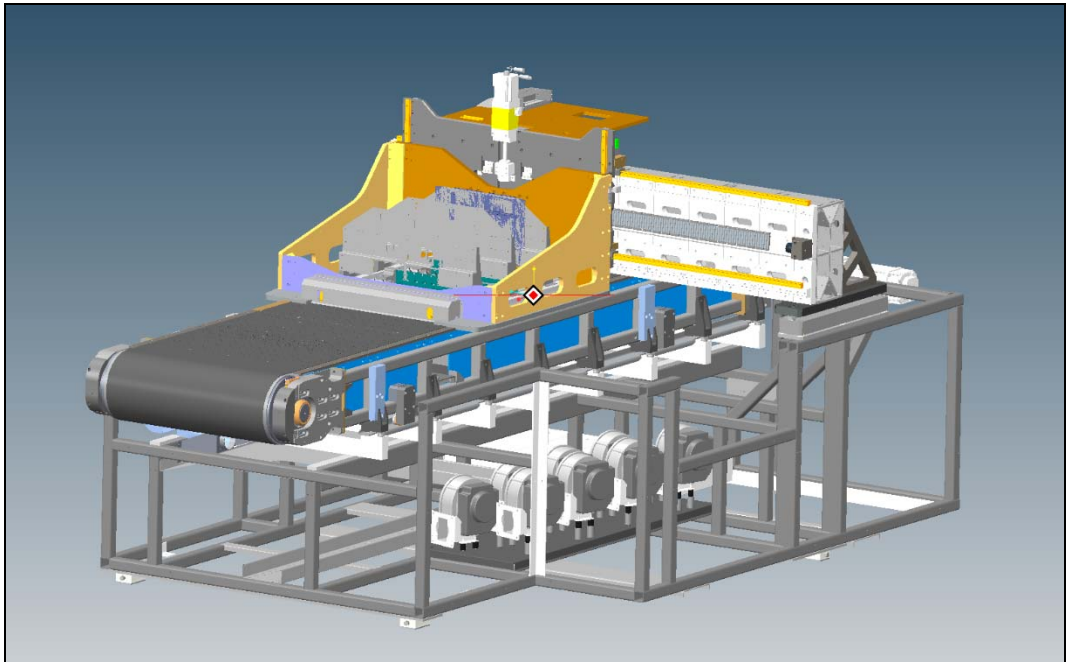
CAD Image of the ML² single pass inkjet printing system without casing, printheads and ink management system
